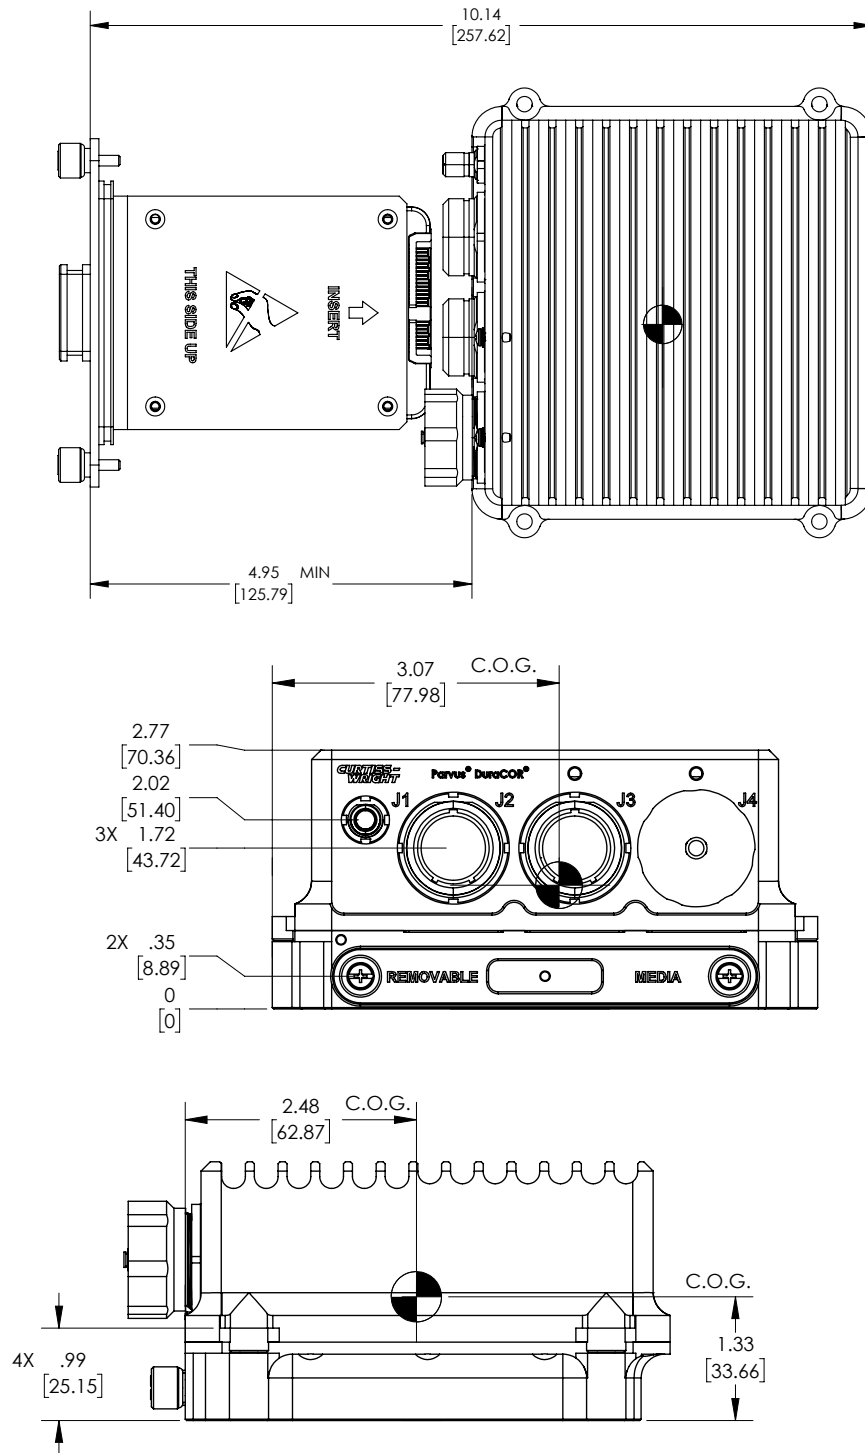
Preliminary DuraCOR 313 with removable storage option dimensional line drawings (measurements shown are in inches and [cm])
